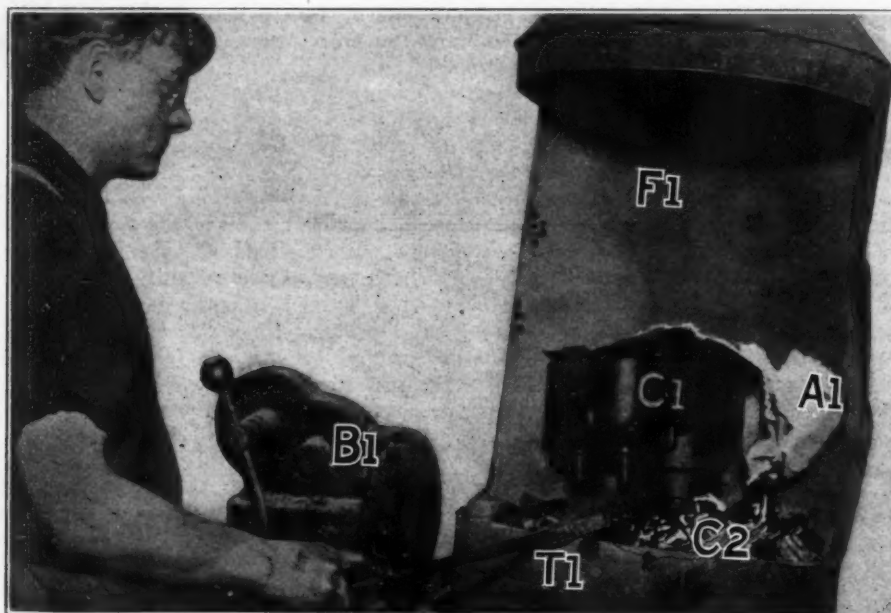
Cylinders placed in blast forge and covered with asbestos, to be heated before welding
